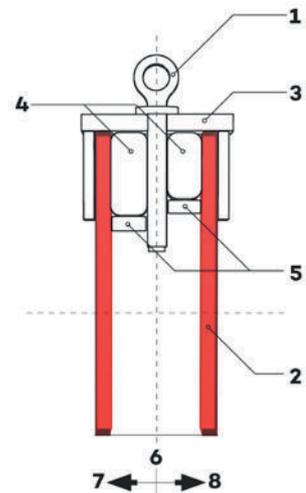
Suspended heating of tubes with holding collar: threaded eye-bolt (1), PLEXIGLAS® tube (2), bell-shaped holding collar (3), rubber block glued to clamping disc (4), threaded clamping disc (5), fastening (6), loose (7), in clamped position (8)
